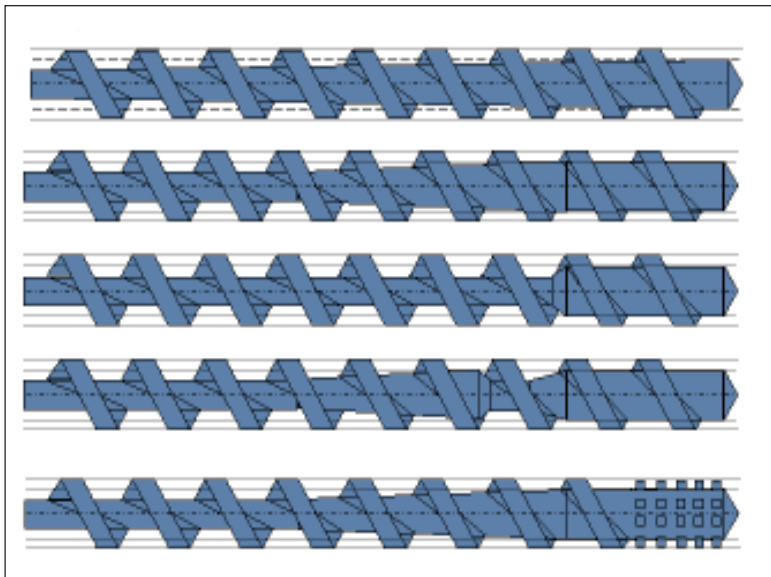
Single Screw Extruder, screw types: standard conical core, metering (met.), short metering (short met.), venting(v), mixing.
